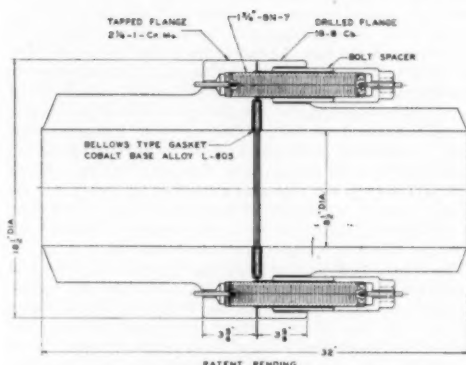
SECTIONAL VIEW OF BELLOWS-TYPE JOINT
